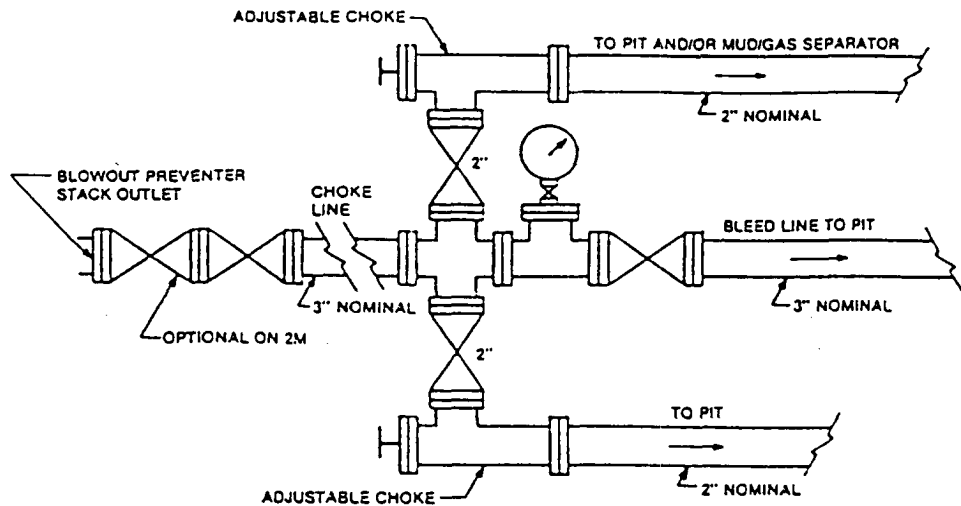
Typical choke manifold assembly for 2M and 3M rated working pressure service — surface installation.
